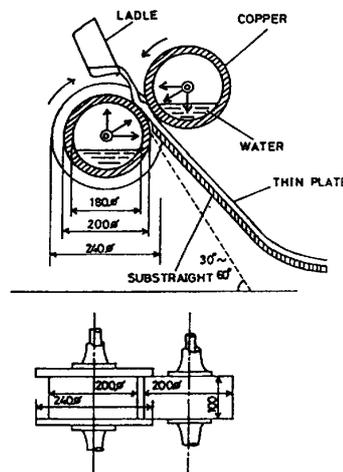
Schematic diagram of the direct-rolling casting machine and rolls
